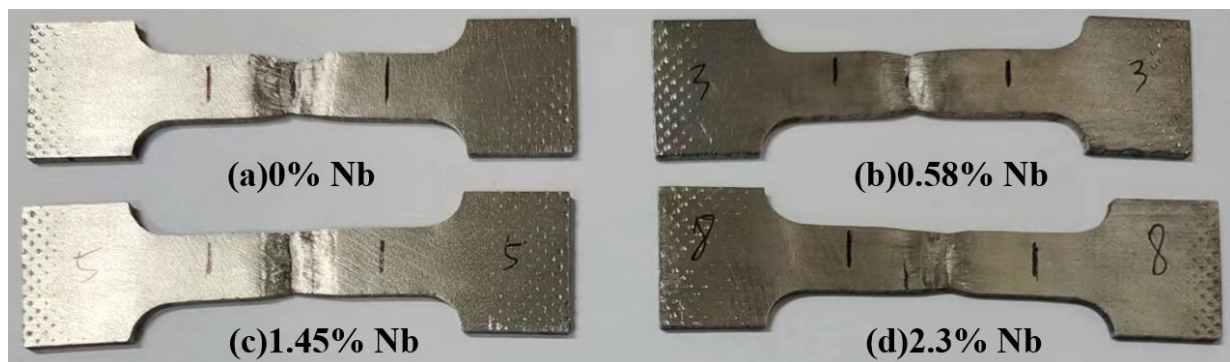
Morphology of austenitic stainless-steel weld specimens after room-temperature tensile testing: (a) 0% Nb; (b) 0.58% Nb; (c) 1.45% Nb; (d) 2.3% Nb.
